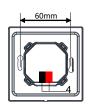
Dimensions - Back View 图 4. 尺寸图 - 背面
